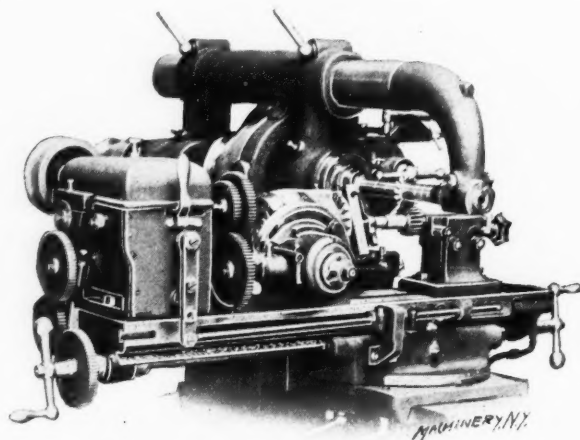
Attachment made by Ludwig, Loewe & Co. for converting the Milling Machine into an Automatic Gear Cutter.
